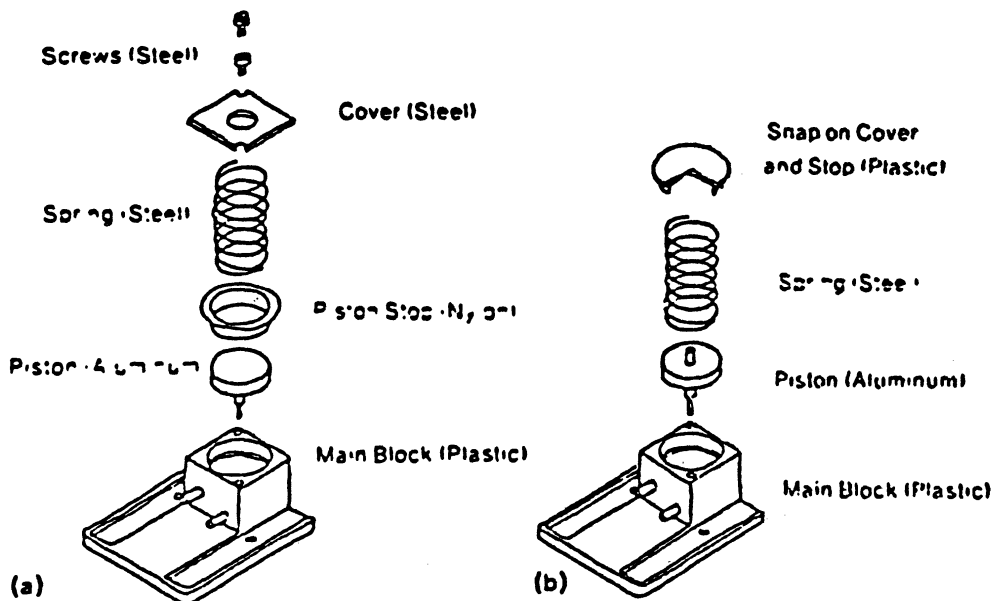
Pneumatic piston subassembly Current design (a) has 7 parts, the proposed design (b) has 4 parts.
